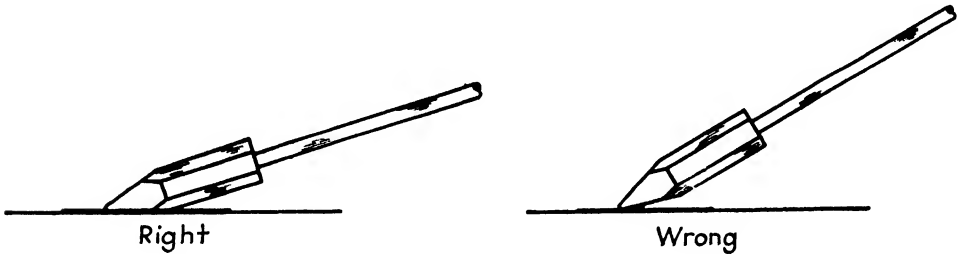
Press the whole face of the soldering iron—not just the point—firmly against the work.
